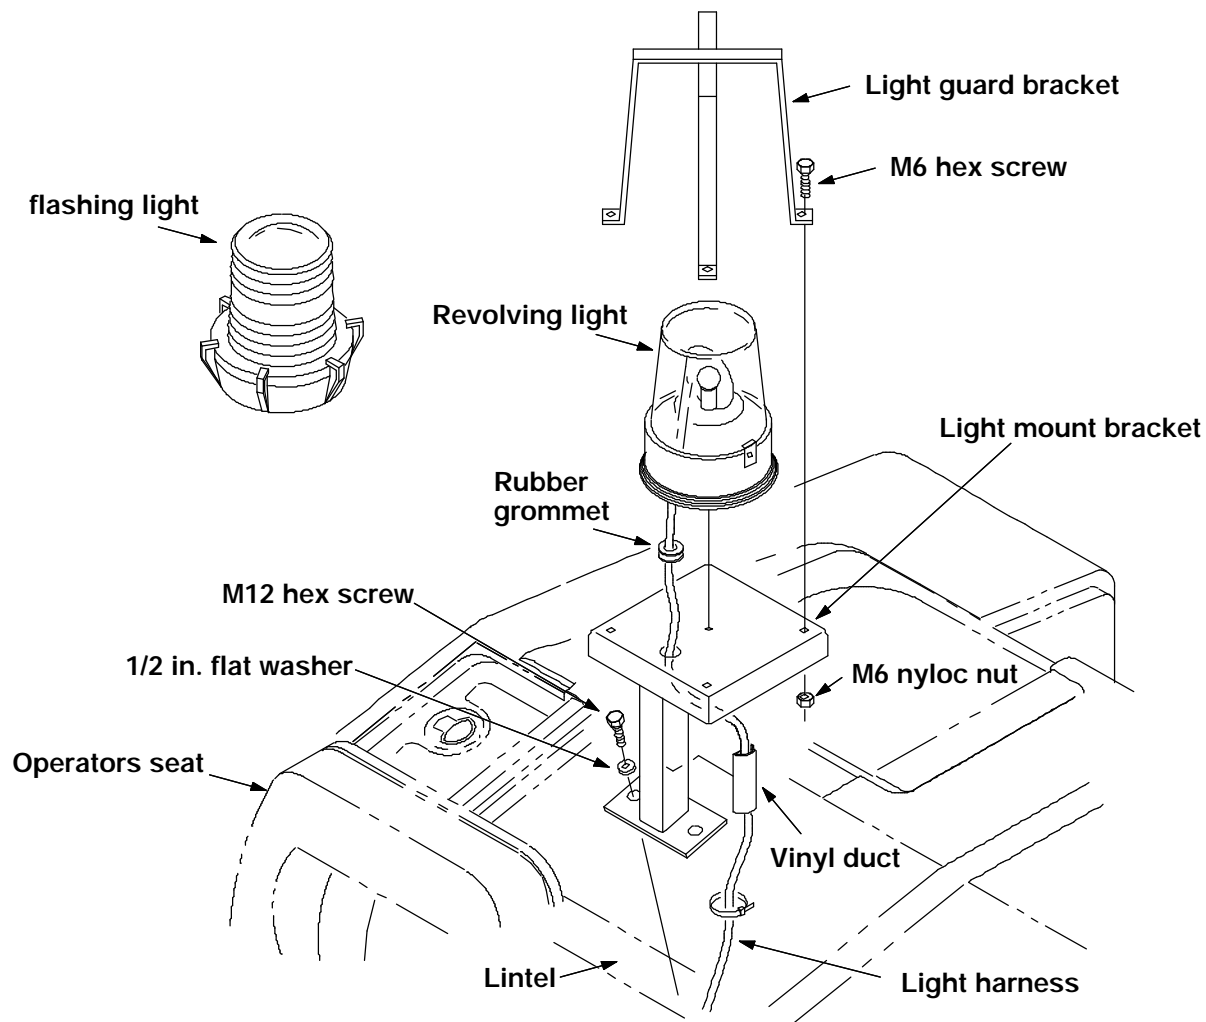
Lintel Mounted Rev/flashing Light Assembly
